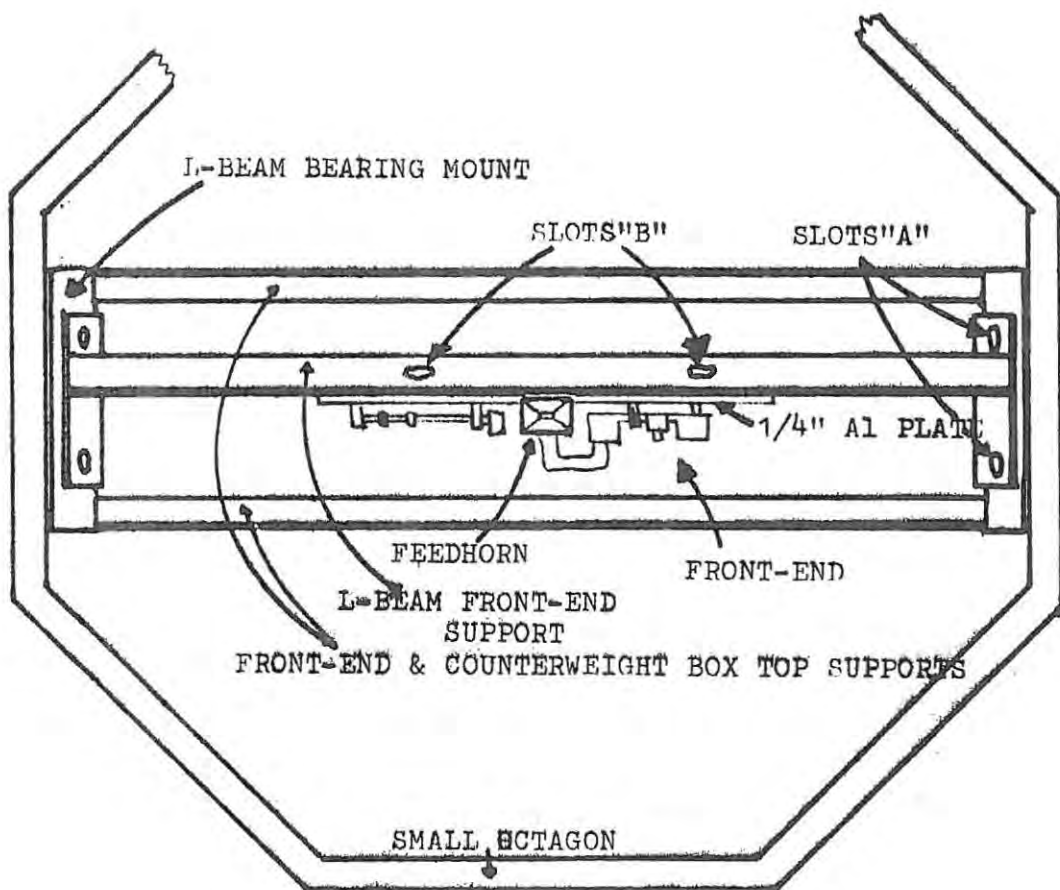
BEARING MOUNTS & SUPPORTED STRUCTURE.
